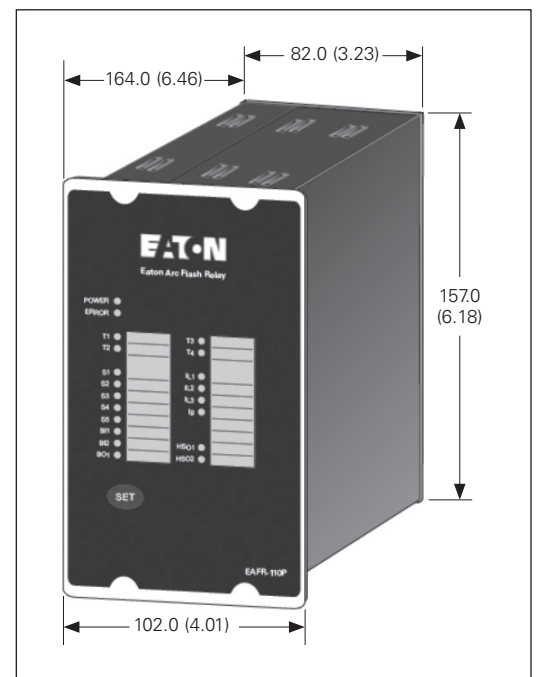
EAFR-110PLV dimensions in millimeters (inches)
